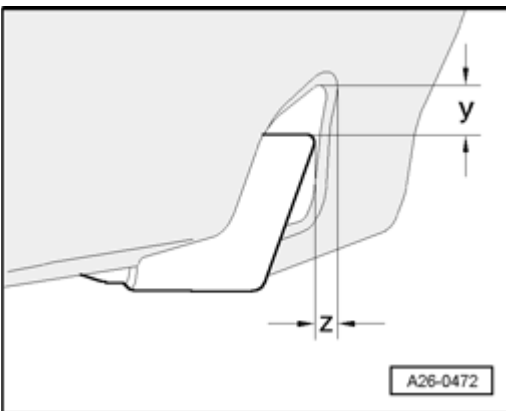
Checking Distances Of End Pipes To Bumper Cover
